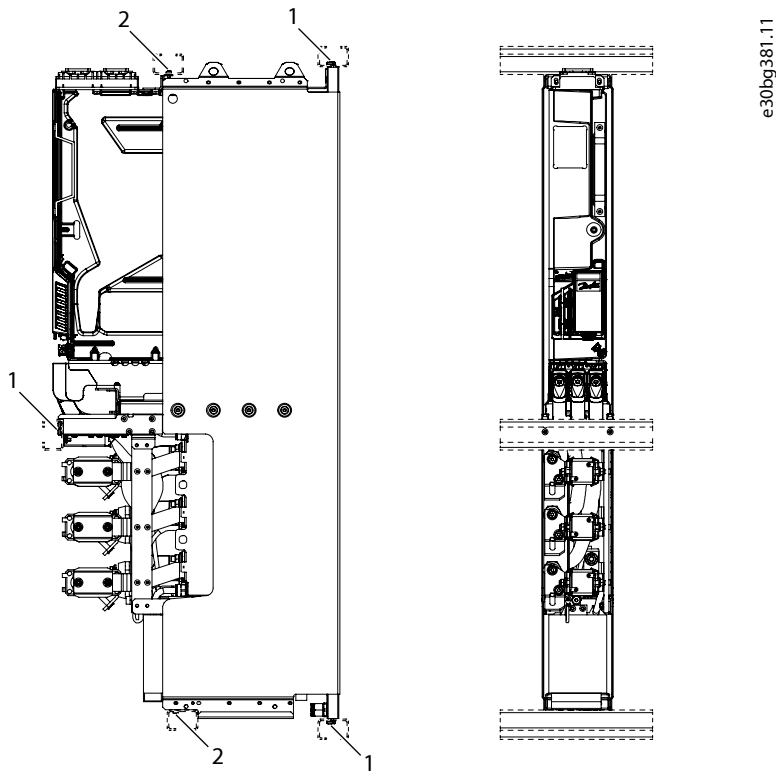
Mounting Holes of the System Module, AFE with the Integration Unit
